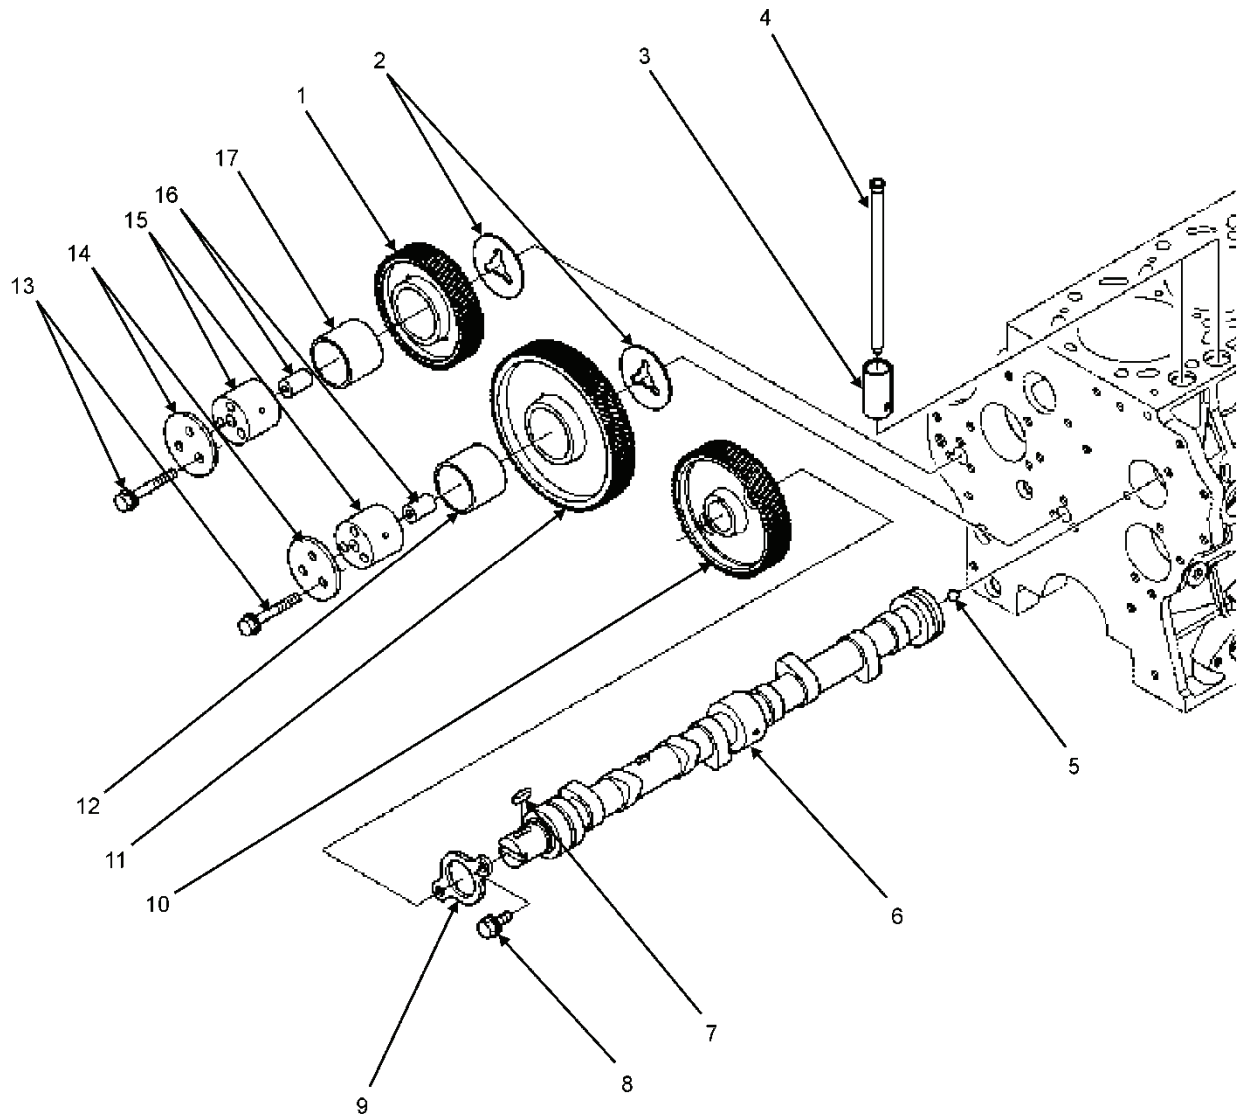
ENGINE CAMSHAFT AND IDLE GEAR SHAFT
